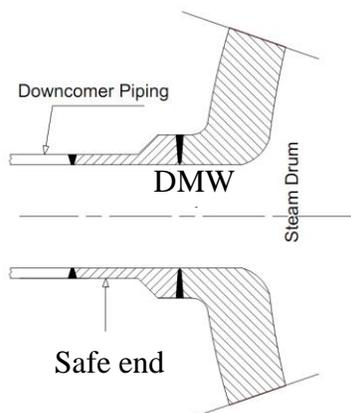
Schematic of steam drum nozzle welded to downcomer piping
